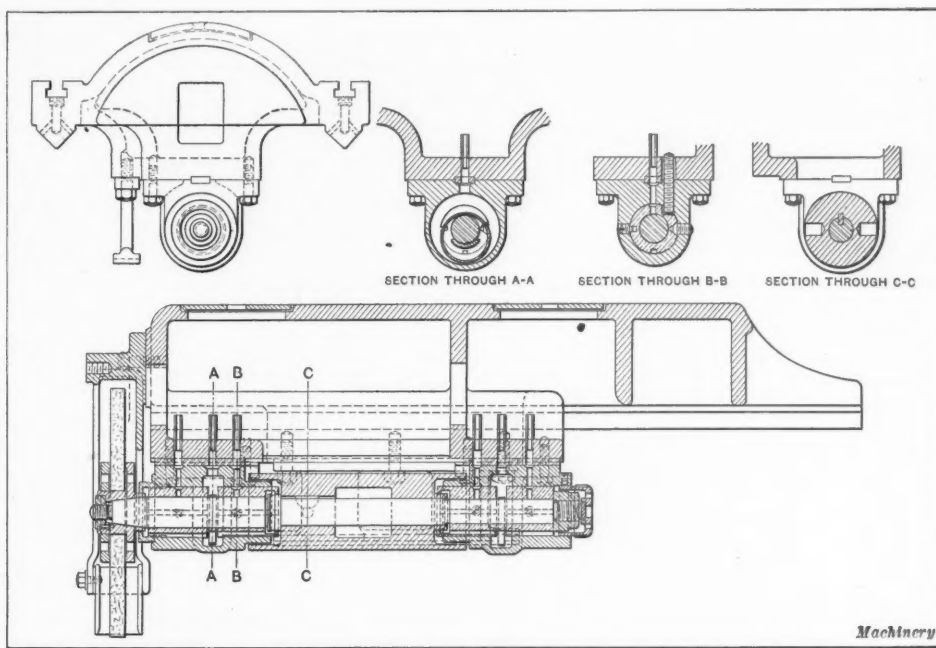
Detail of Ram and Cross-sectional Views of Spindle Bearings
